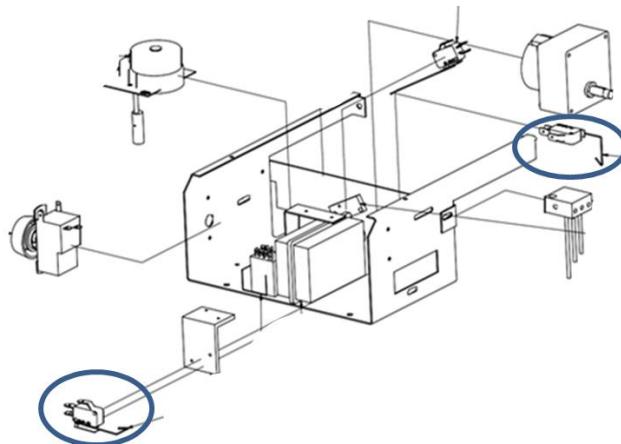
Section from the exploded view of the upper part of the ice maker
